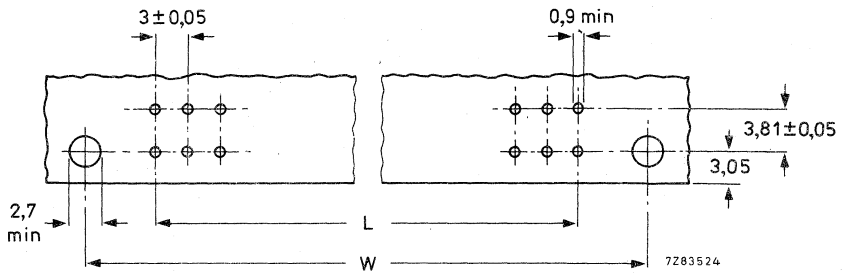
Hole pattern for a male part with 90° angled dip-solder pins.
